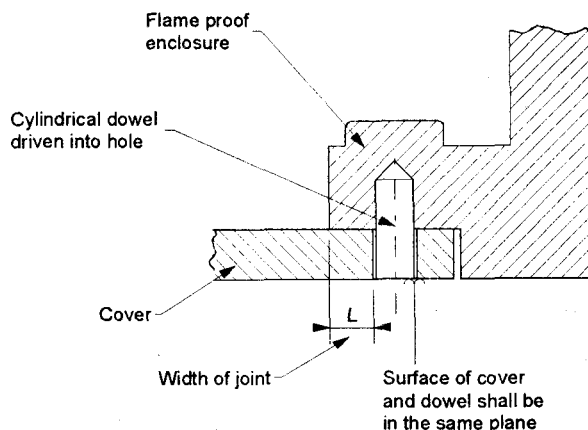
Example of construction for indirect checking of a flanged group I flameproof joint
